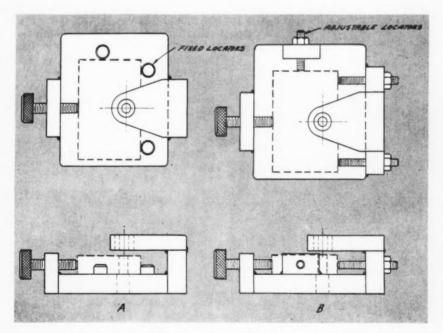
Sketch (A) shows a drill jig in which the work is located in relation to the drill bushing by three dowels. Sketch (B) shows a
